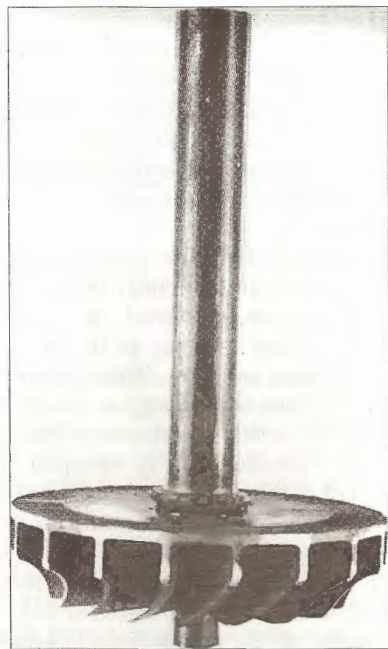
Rotor of turbo-compressor for tractor diesel engines.
